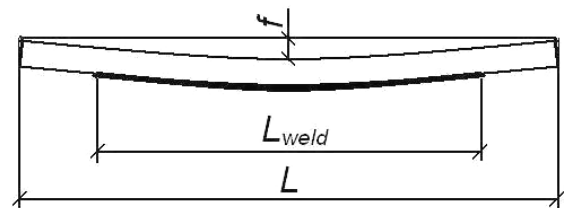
Scheme of overlaying welding of idle rolls in process of alignment of element by welding.
